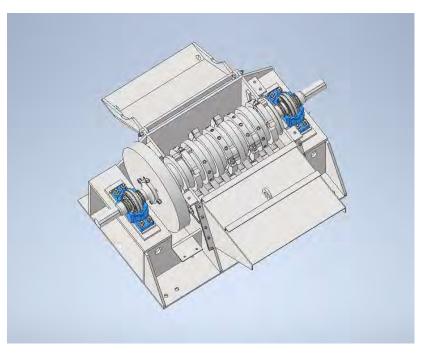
Upper Housing Removed - Horizontal Model T3 Hog
